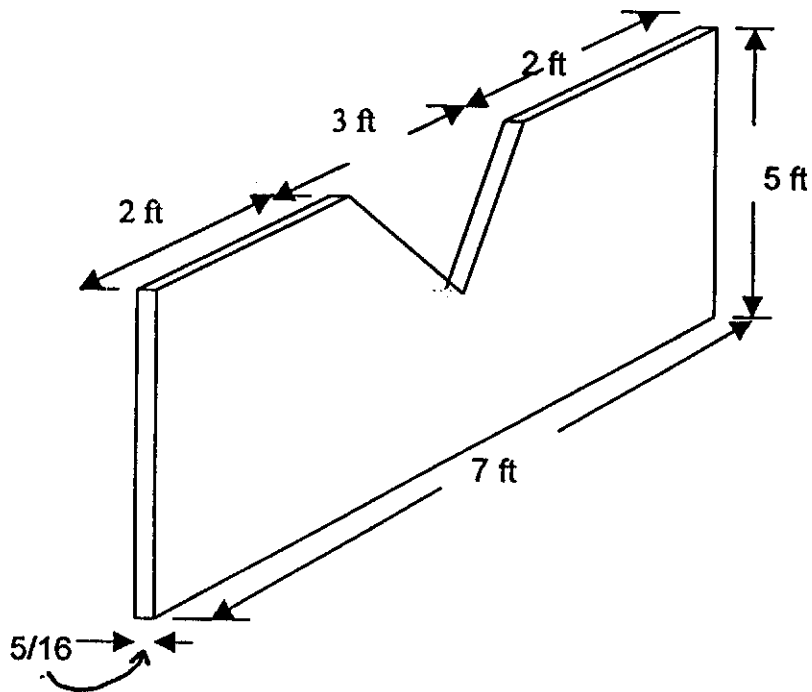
Dimensions of the V-notch Weir used in the Outdoor Hydraulic Laboratory.
